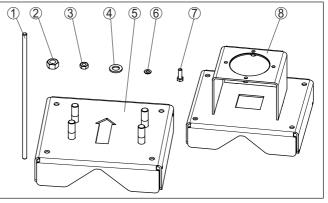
Mounting bracket for pipes irradiated at right angles KV 31, horizontal sensor mounting
